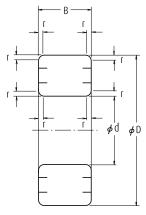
Boundary Dimensions of Radial Ball and Roller Bearings
